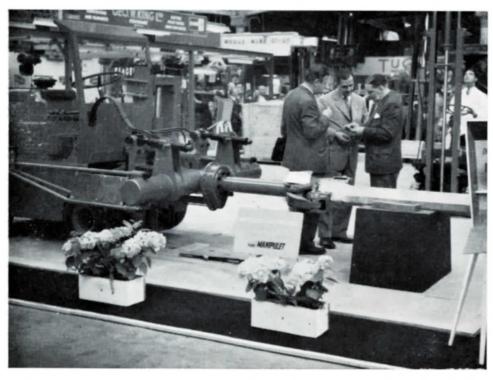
500 LB. HEAD WRIGHTSON—BROSIUS MANIPULET
